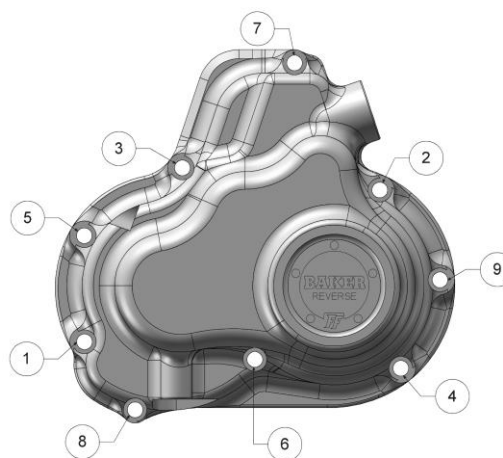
| TORQUE SEQUENCE FOR FRONT OR REAR FEED HYDRAULIC COVER
